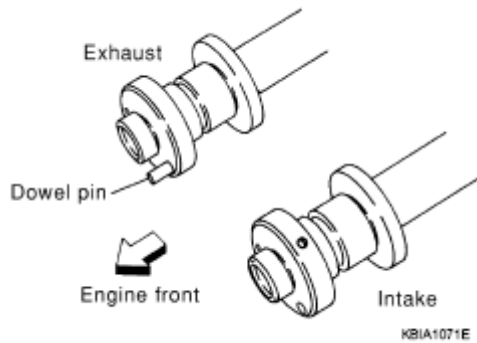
Attaching Dowel Pin To Camshaft Front End Face On Exhaust Side
